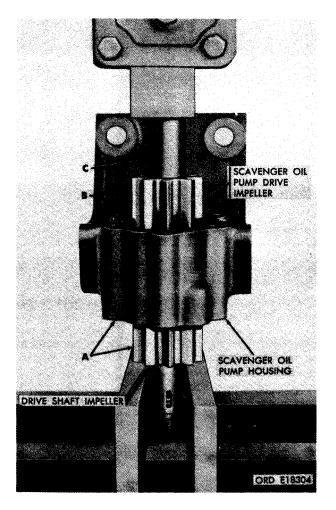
REPLACING PRESSURE OIL OR SCAVENGER OIL PUMP DRIVEN IMPELLER BUSHING-TYPE BEARINGS.
